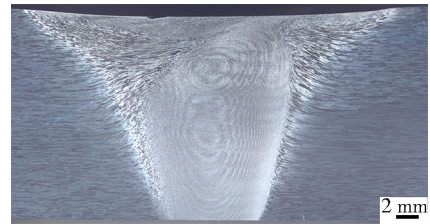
Welding defects caused by the mismatch of rotation speed and travelling speed
